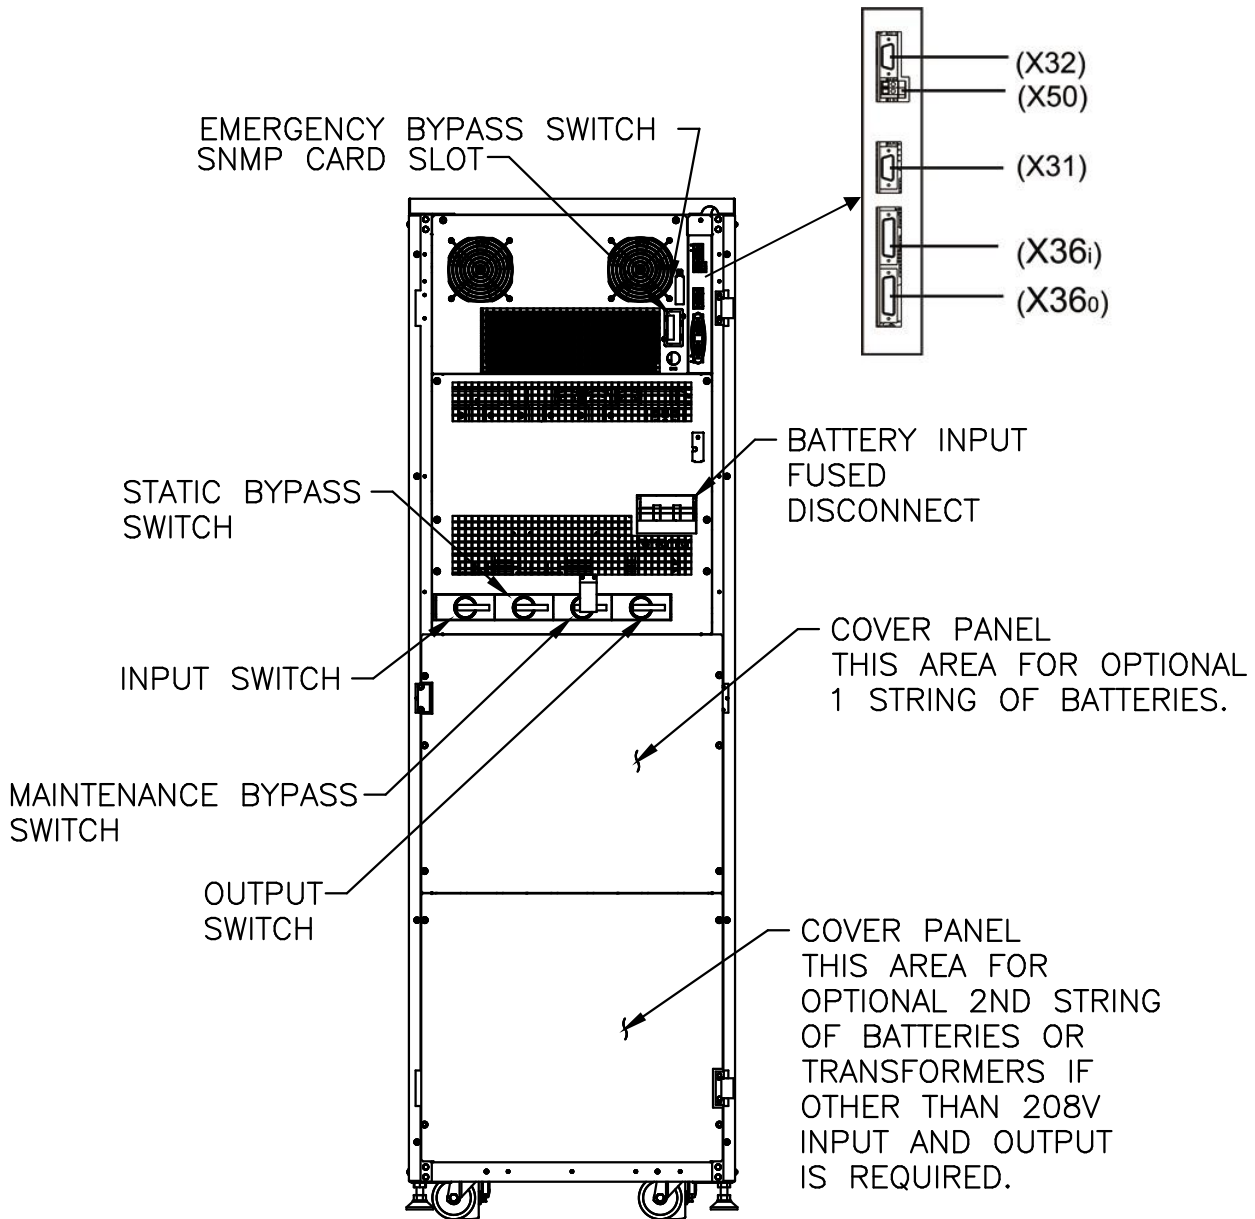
30-40kVA Front Cabinet view with inner protective panel removed.
